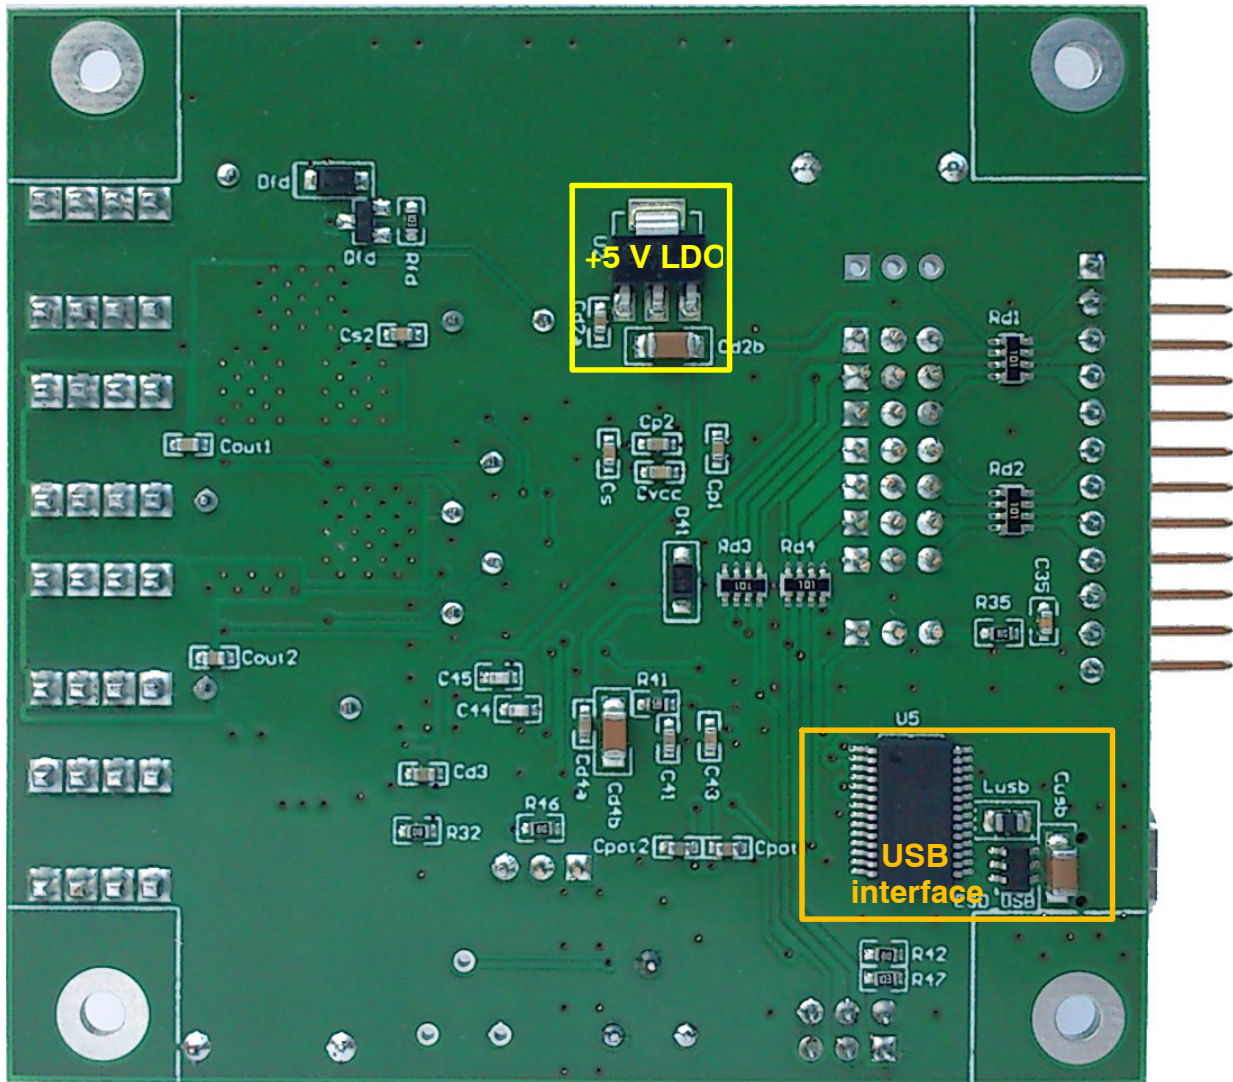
NCV7535 Evaluation Board Picture, Bottom Side
